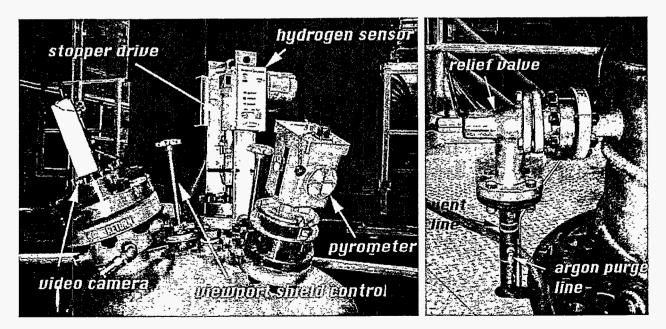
Left: Upper cover with 2 sightglasses and the stopper drive actuator port. Right: Pressure relief valve bolted to the body of the furnace. Argon bleed lines are used to dilute flammable mixtures in the gas supply and vent lines.
